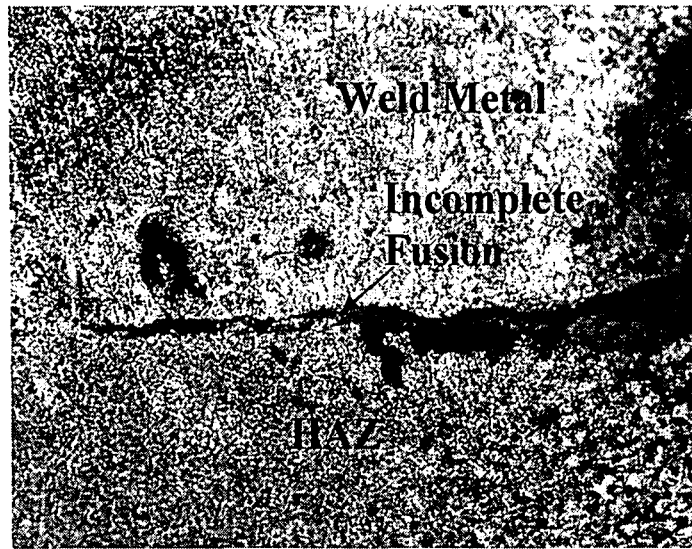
Incomplete Fusion-Specimen 36-6, Bottom-left Section
